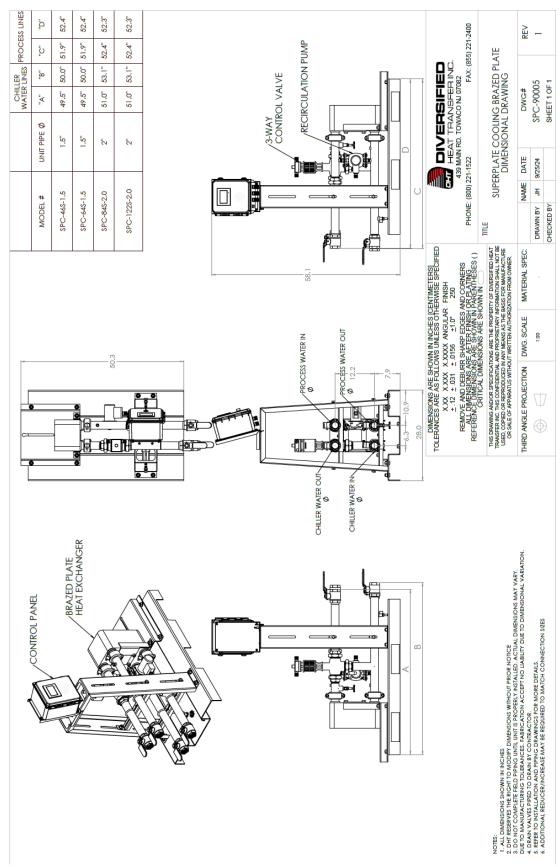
SPC Series Brazed Plate Dimensional Drawing
